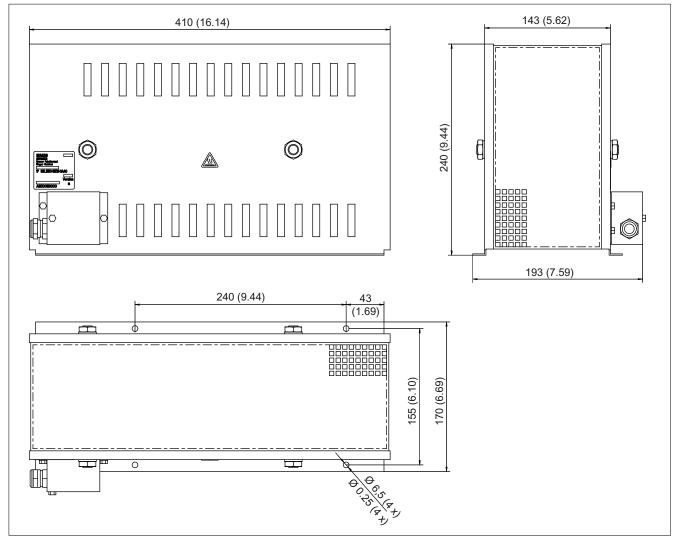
Dimension drawing of braking resistor 6SL3100-1BE31-0AA0 where P_n/P_{max} = 1.5 kW/100 kW, all dimensions in mm and (inches)
